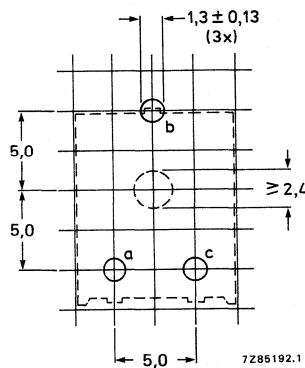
Hole pattern for horizontal versions, viewed from component side.
